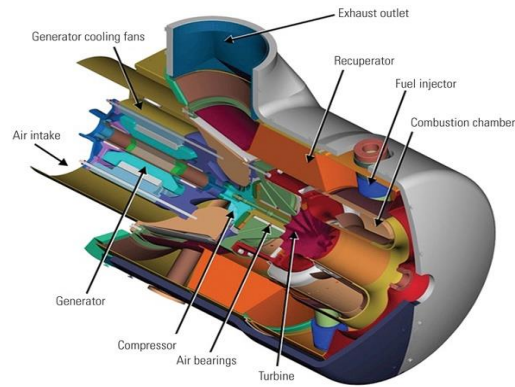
Cutaway View of a Capstone C65 Turbo generator
